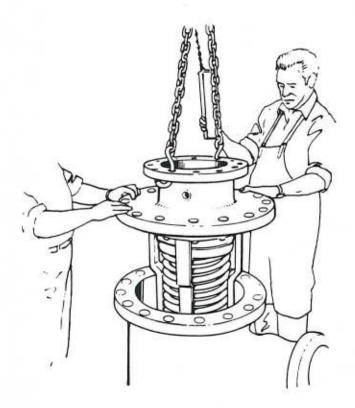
REMOVING INLET ADAPTER WITH MAIN VALVE ASSEMBLY
